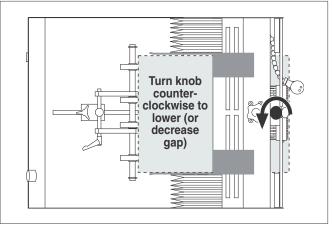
Adjusting Gate Assembly for Correct Gap
